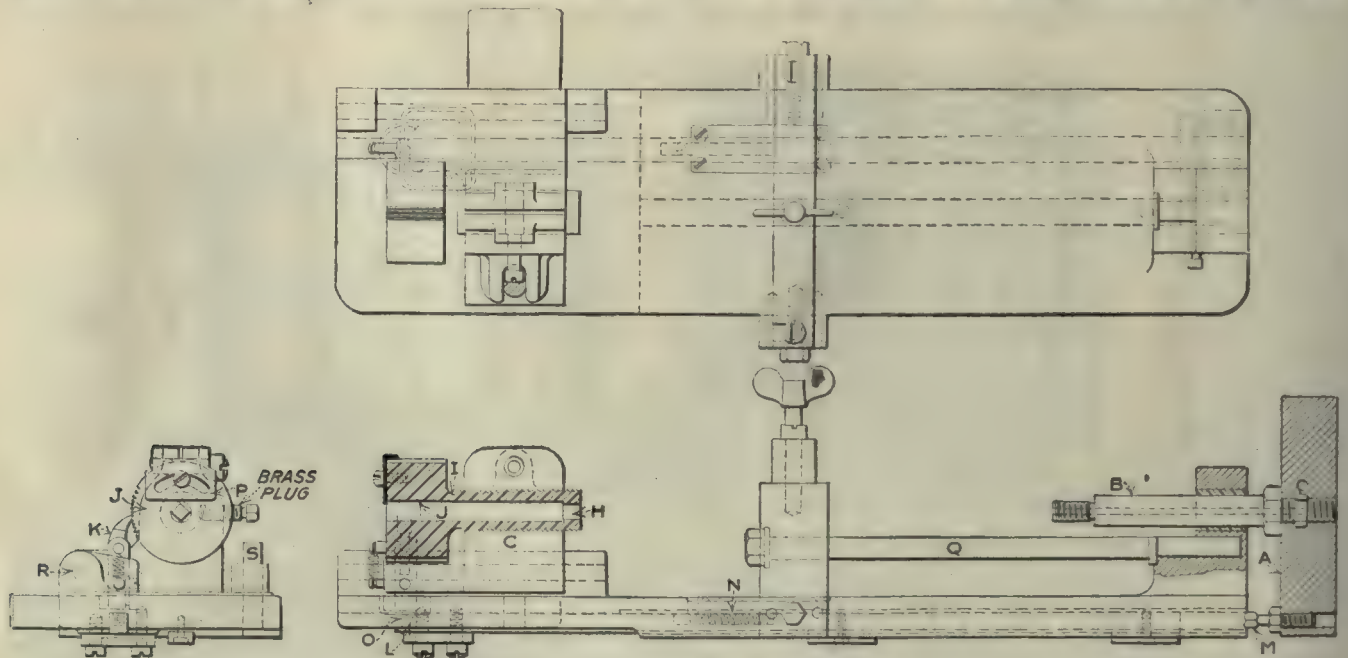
THE SHAVING FIXTURE ASSEMBLED
